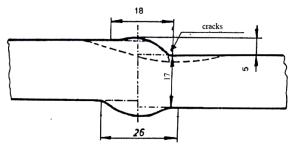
Cross-section of the tank wall at the location of cracks. Slika 2. Poprečni presek zida rezervoara na mestu sa prslinama
